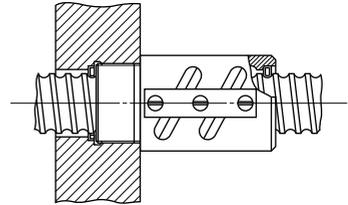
Installation of brush-seal to a ball nut with thread screw
